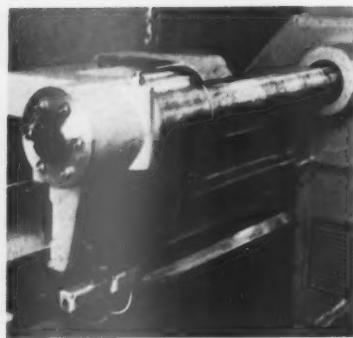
Rear view of the Carlstedt machine showing the neat arrangement of the headstock which permits quick work-handling
